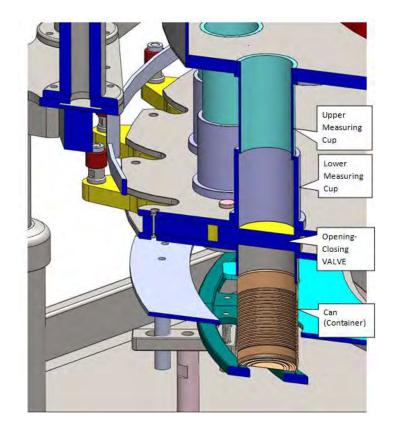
Measuring Cups and Valves in Tuna Flake Filling Prototype Machine
